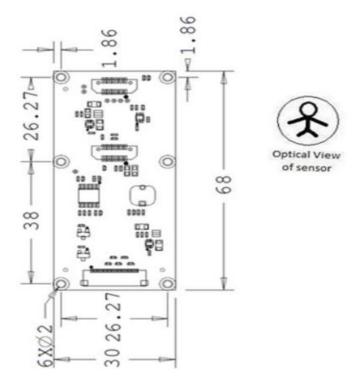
ACC-TK1-CUMI0330CAM board outline dimensions
